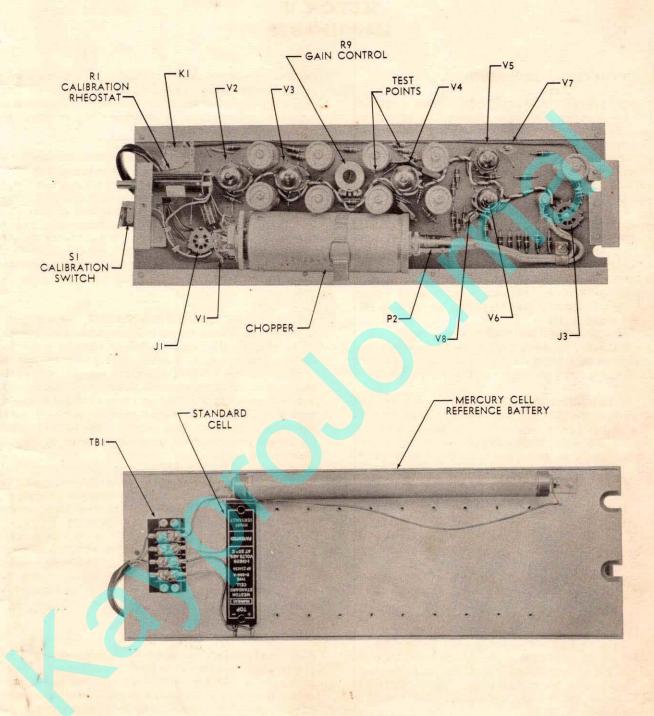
Amplifier Assembly, Top and Bottom Views
